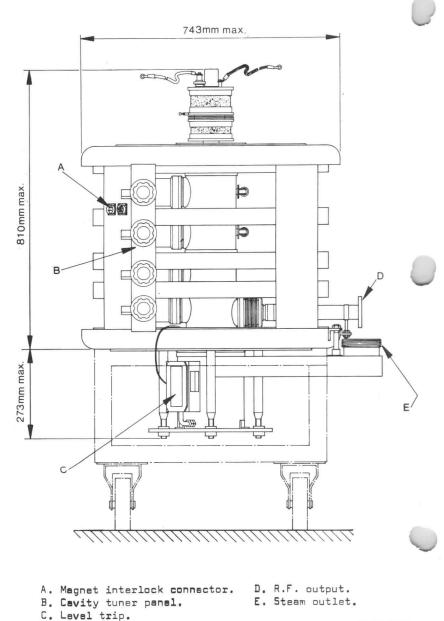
Z173/50Z Klystron in ZM173 Mount Assembly
